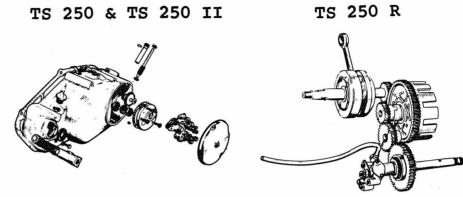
Different oil pump drives used on the Suzuki Savage. Oil pump on TS 250 R is located on left side of engine to the rear.
